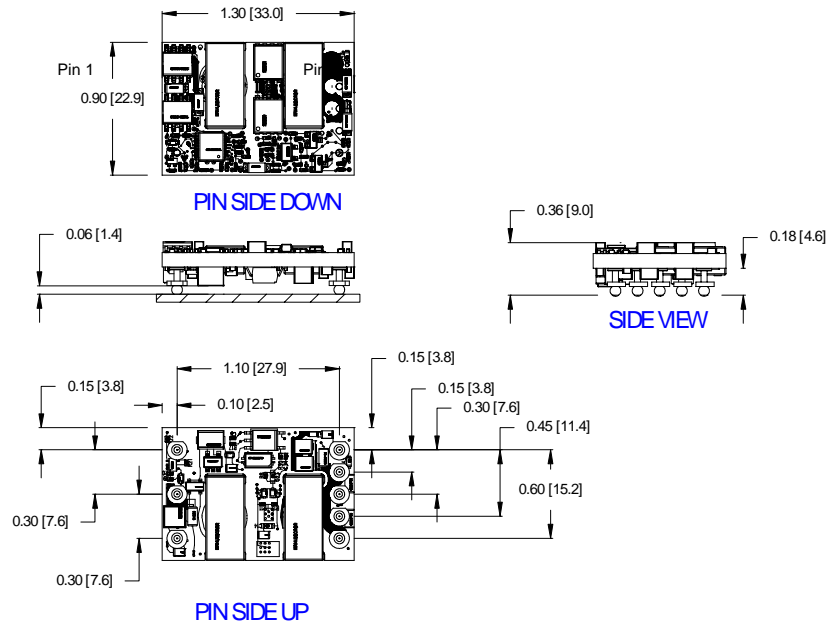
B. Mechanical Outline – SMT (Solder Ball) Termination.
